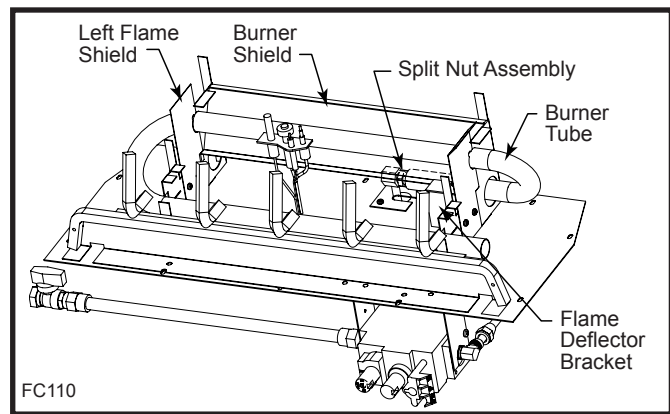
Remove flame shield, flame deflector bracket and burner shield. Remove air shutter and slide burner tube to the right.
